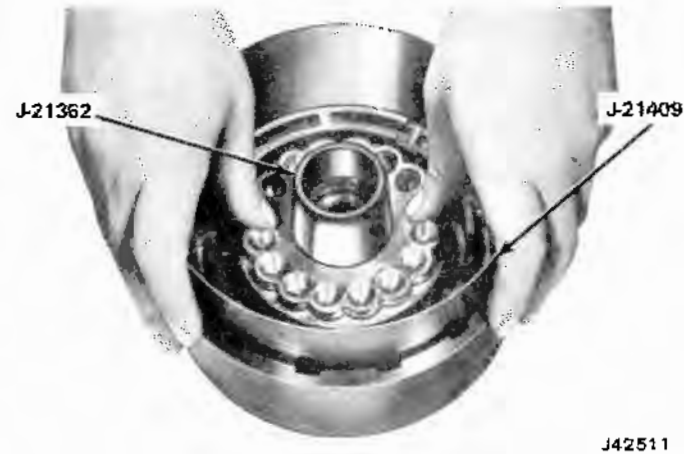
Installing Center Seal in Direct Clutch Housing
